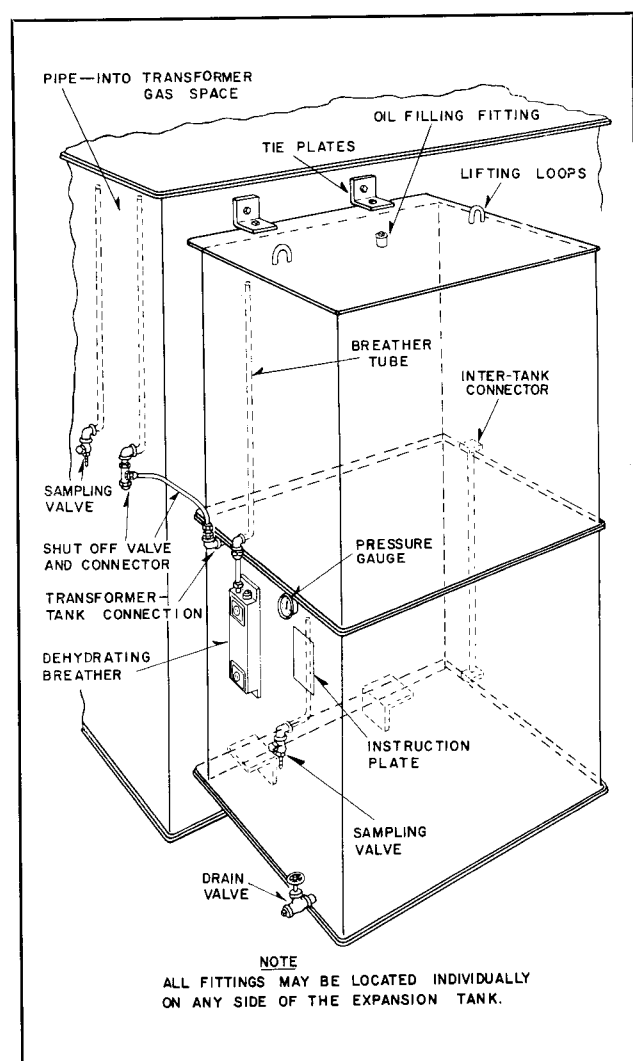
Typical Installation of Gas-Oil Seal Expansion Tank
